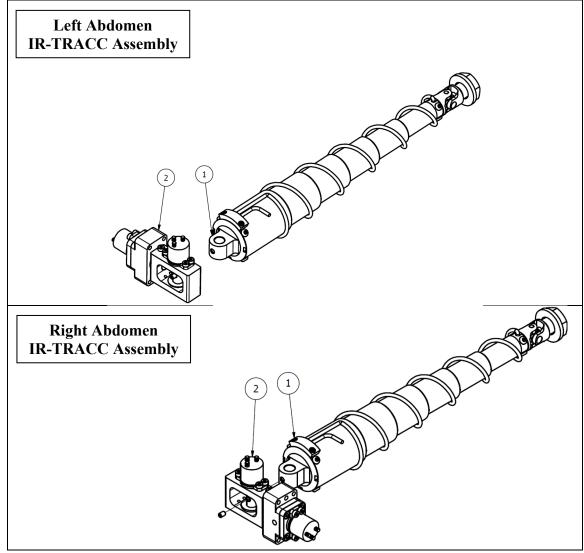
Lower left and right abdomen IR-TRACC assembly components
